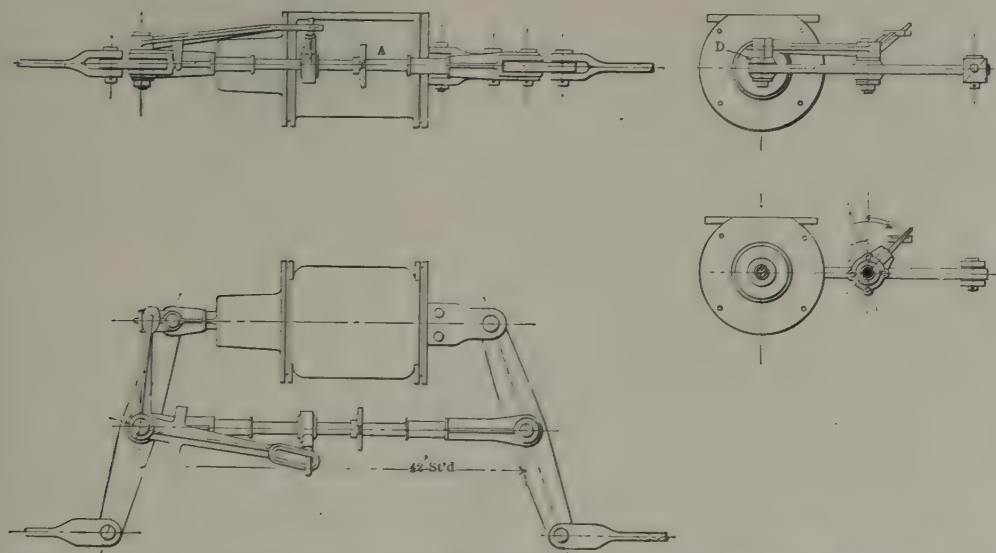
Creco Slack Adjuster for Passenger Train Cars. Chicago Railway Equipment Company.
